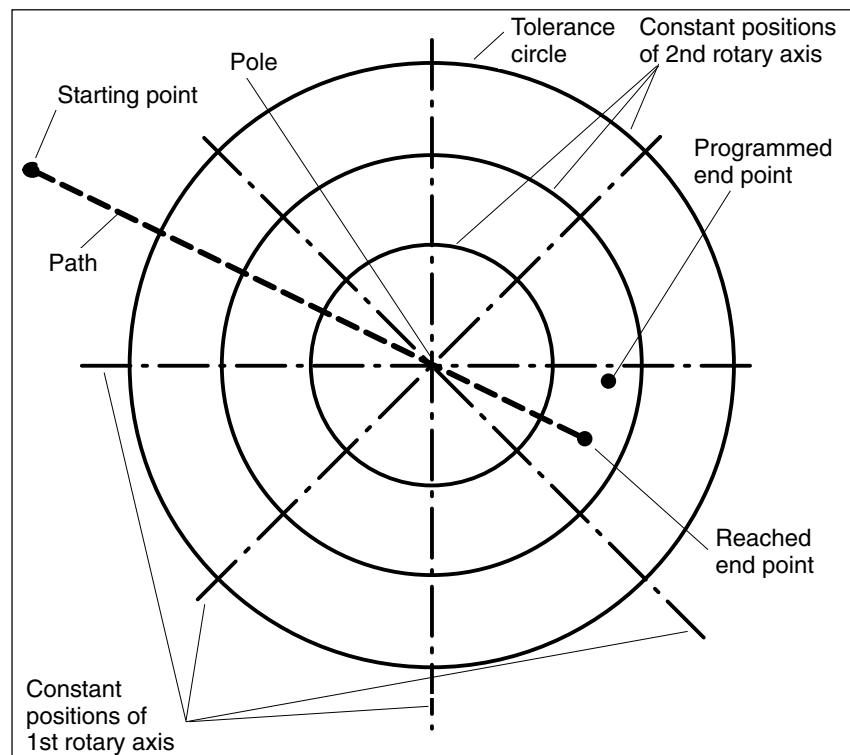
Generic 5-axis transformation; end point of orientation inside tolerance circle
